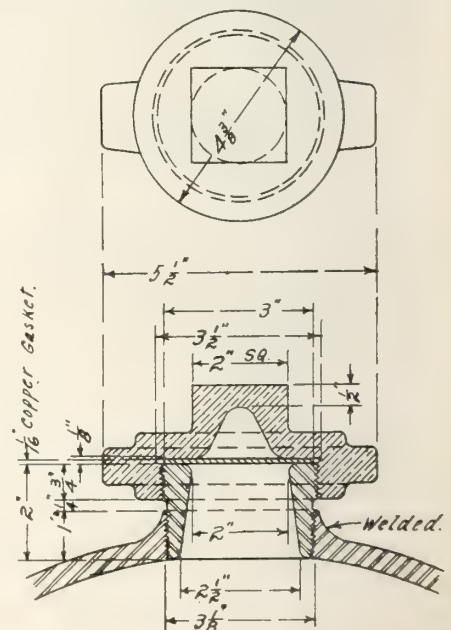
SECTION OF PLUG SHOWN IN FIG. 8.
